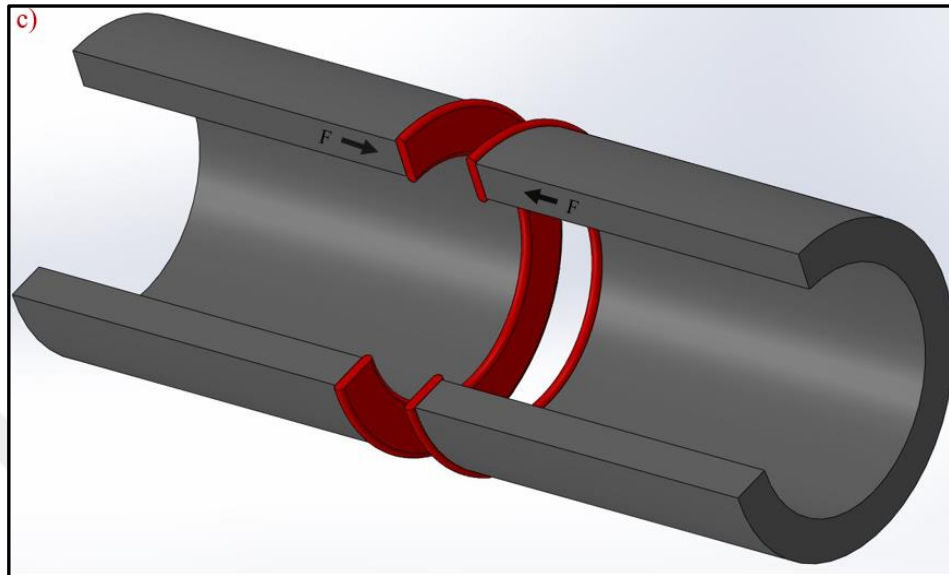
The heating tool was withdrawn in preparation for fusion
